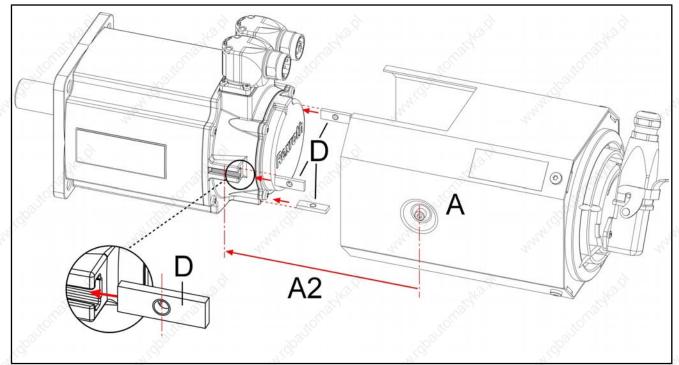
Assembly of fan unit LEM-AB-116N-xx-NNNN Mounting procedure
